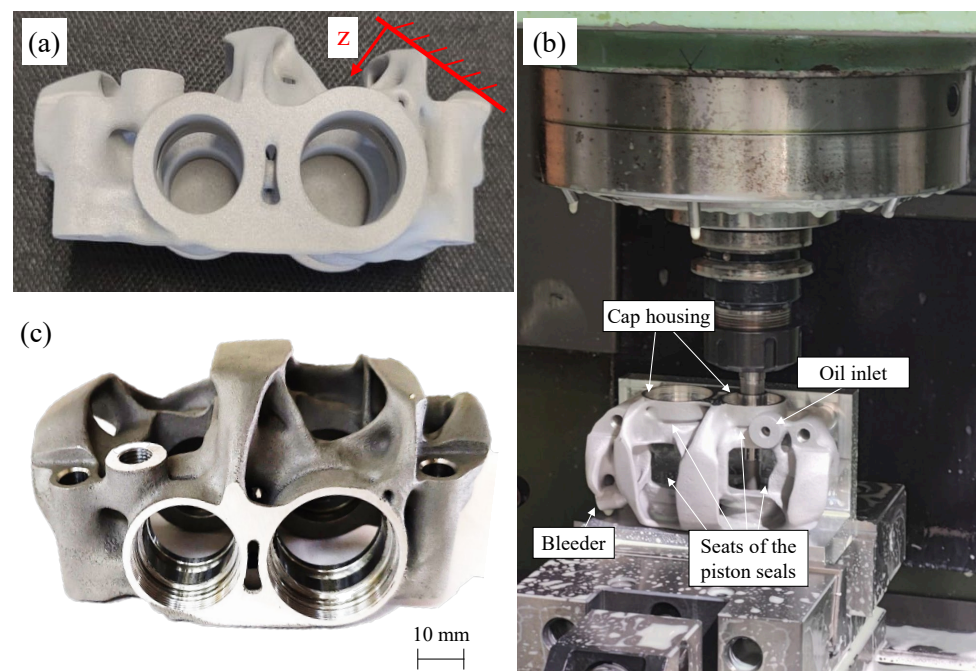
Manufacturing of the brake caliper: (a) as-built 3D-printed caliper with indication of the build direction *z*, (b) detail of the milling process for machining the pistons’ seals on the inner pad side, and (c) the machined caliper.
